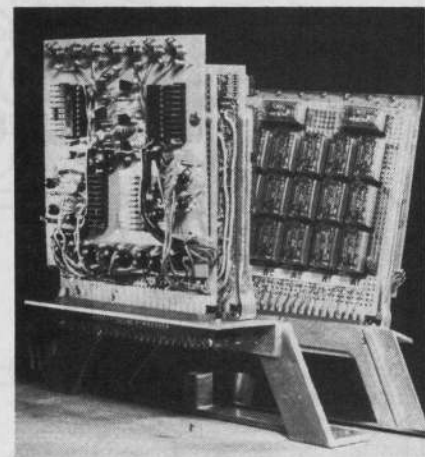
THE RELAY-DRIVER BOARD is mounted parallel to the relay board, seen reflected in the mirror.
